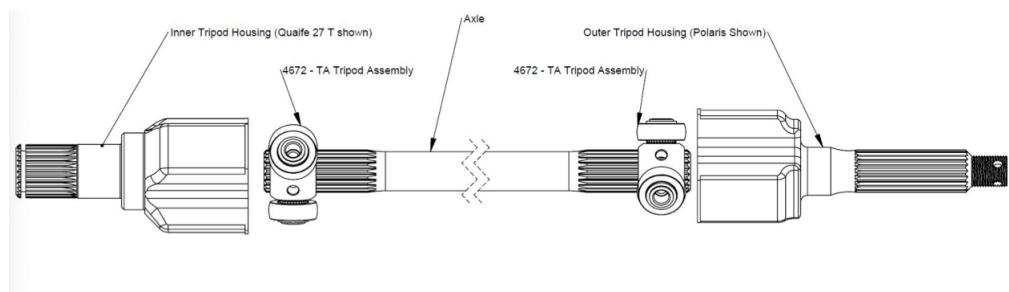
Axle Shaft Assembly with Tripod Housings and Joints [15]
